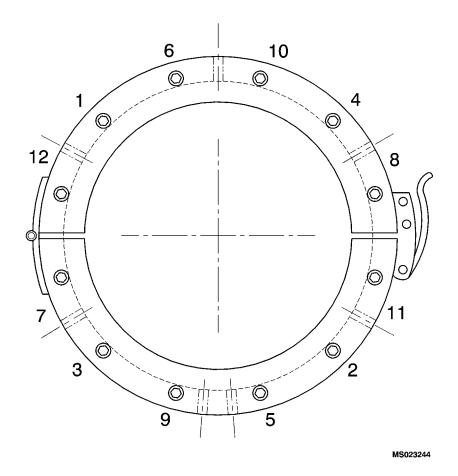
Bolt Tightening Pattern for the Lower Clamp Ring
